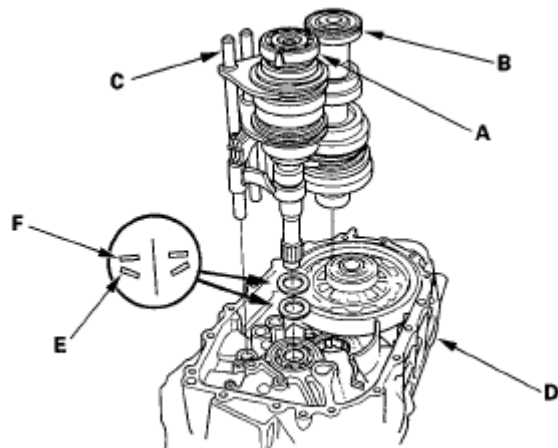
Identifying Mainshaft Assembly, Countershaft Assembly, Shift Fork Assembly And Clutch Housing
